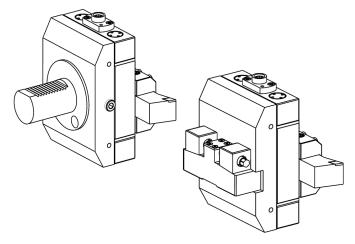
Dynamometer Type 9129AA with machine adapter Type 9129AB40 (left) and Type 9129AD25 (right) and tool holder Type 9129AE25
